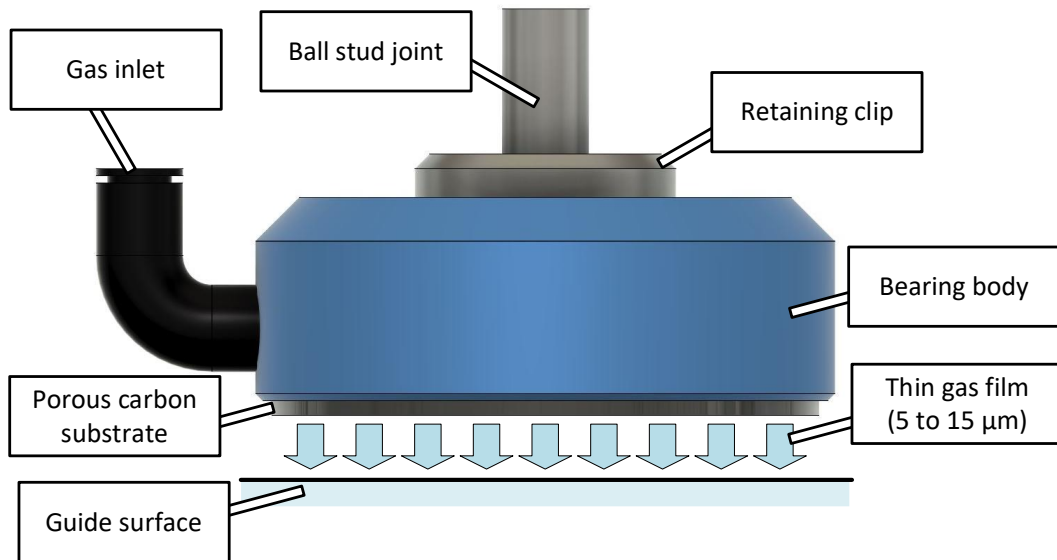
Schematic of a planar air bearing with mounting hardware and inlet fitting.
